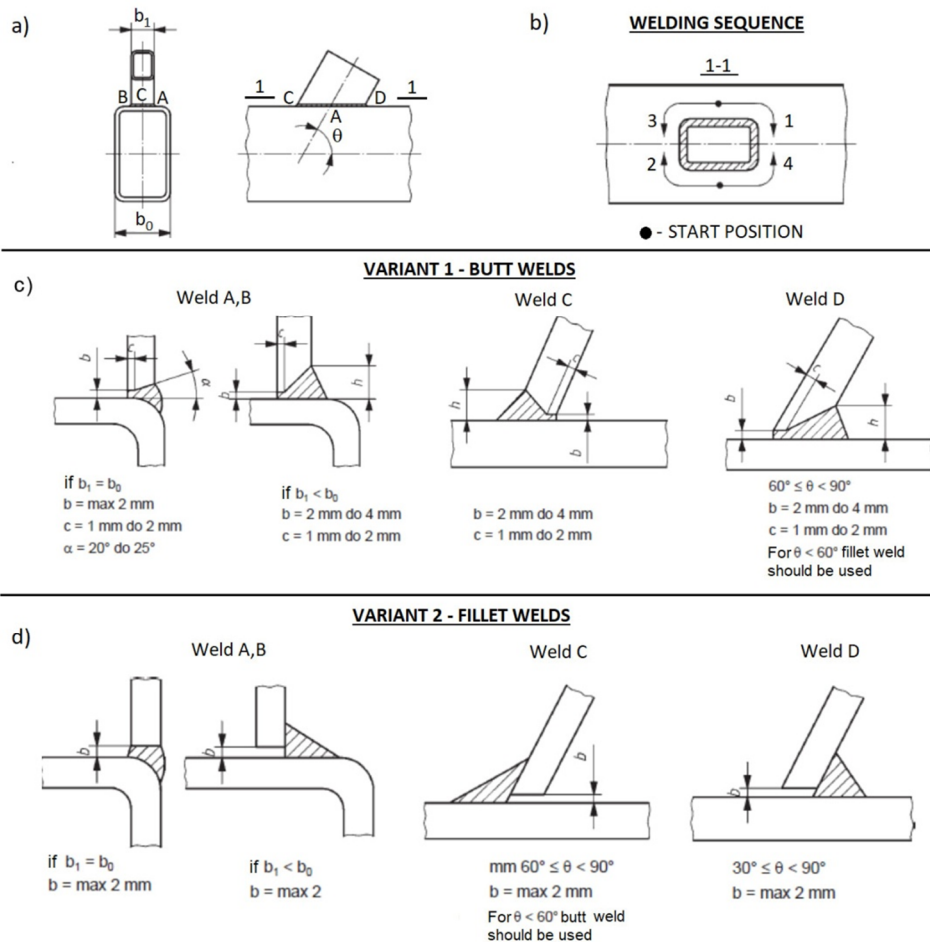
Welded joints in rectangular steel hollow sections: a) description of welds and dimensions, b) start and stop positions and welding sequence, c) preparation of joint faces in the case of butt welds, d) preparation of joint faces in the case of fillet welds
